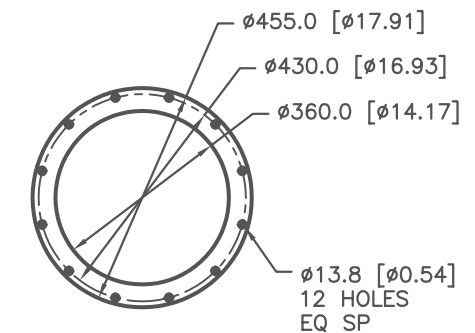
DETAIL OF SEPARATE CIRCUIT AFTERCOOLER INLET/OUTLET FLANGE
